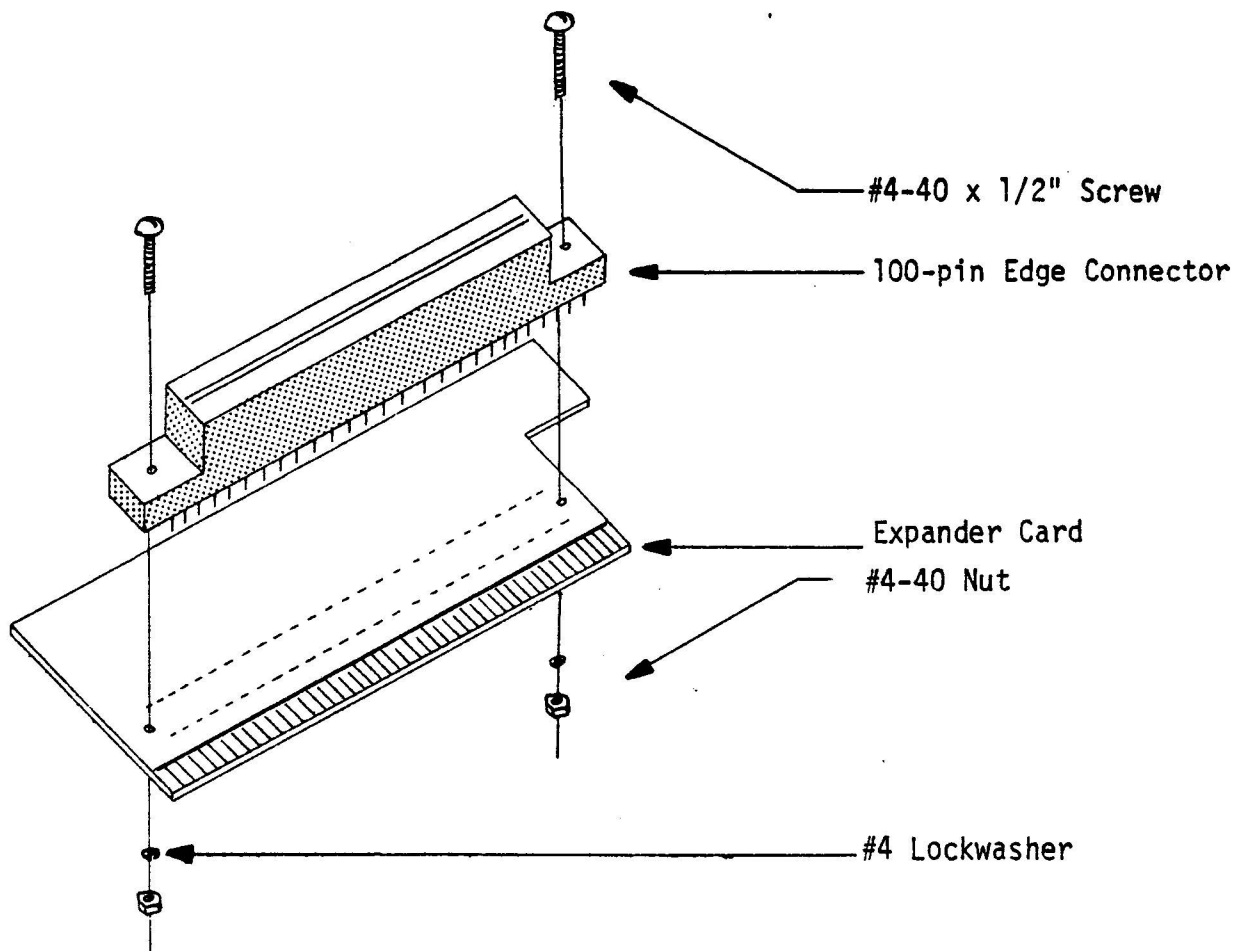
Installation of 100-pin Edge Connector onto Expander Card
